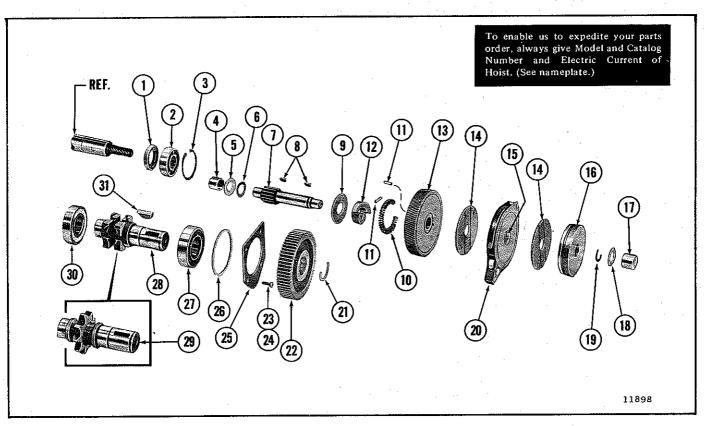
GEARING AND LOAD BRAKE PARTS (1/4 & 1/2 Ton Hoists)
